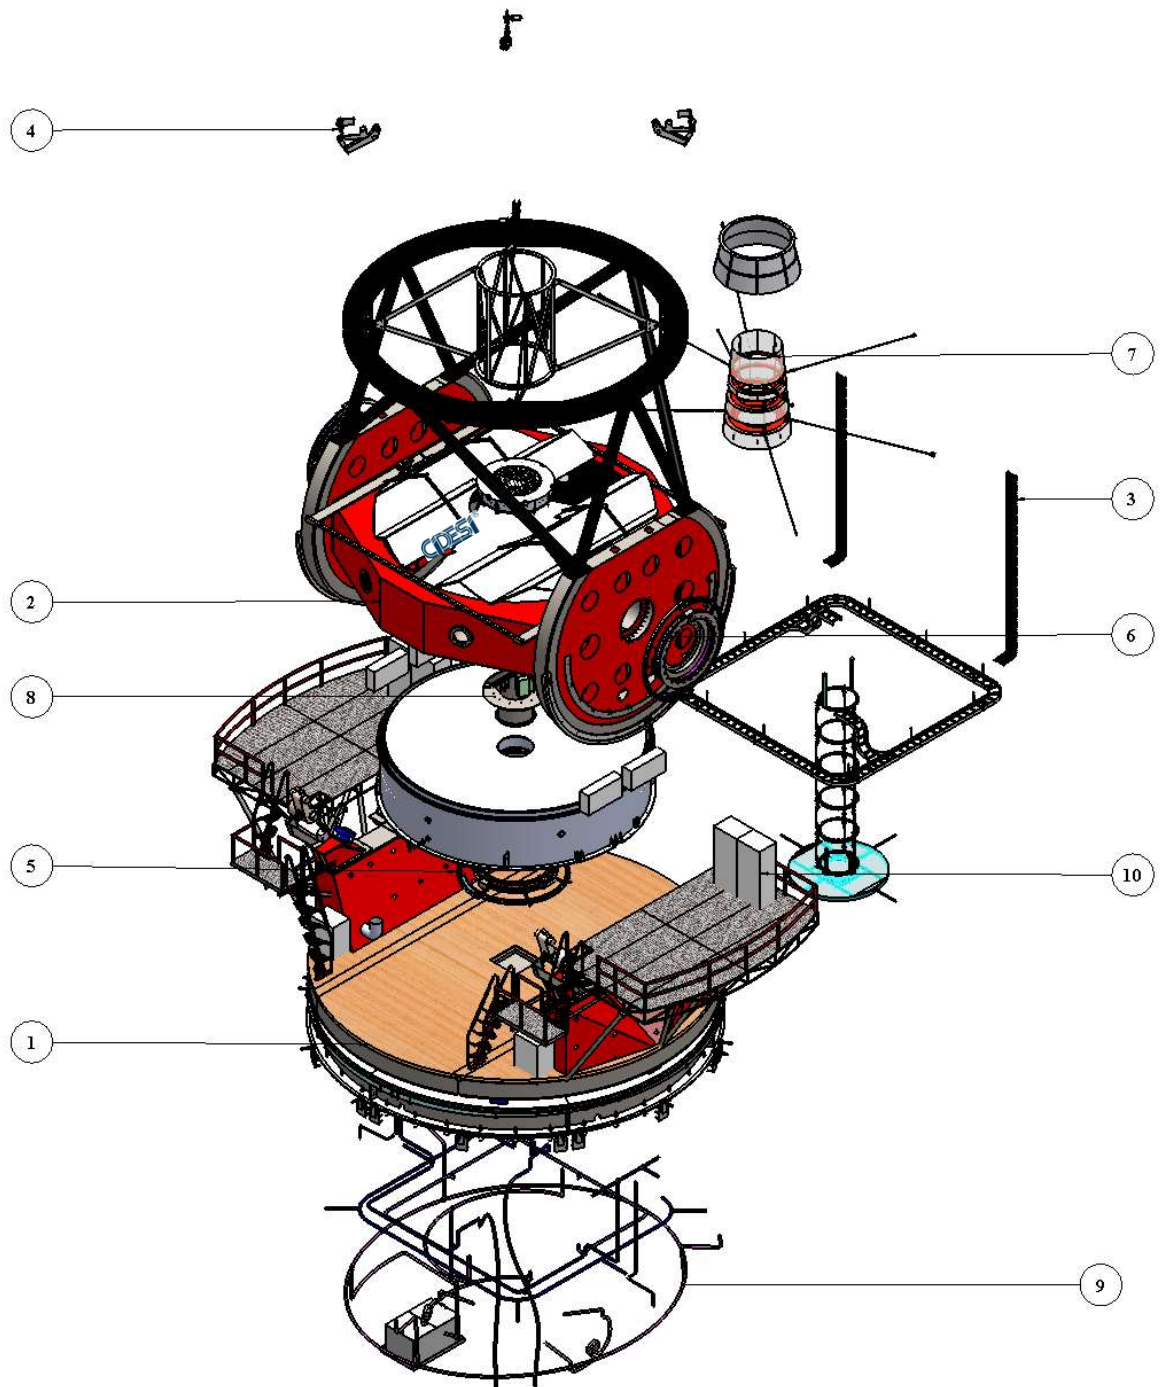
TSPM-TL 3D model exploded view [R.11].
